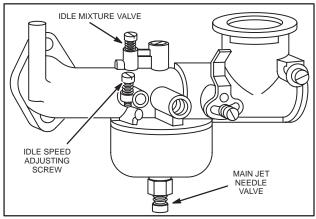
LARGE ONE-PIECE FLO-JET CARBURETOR
